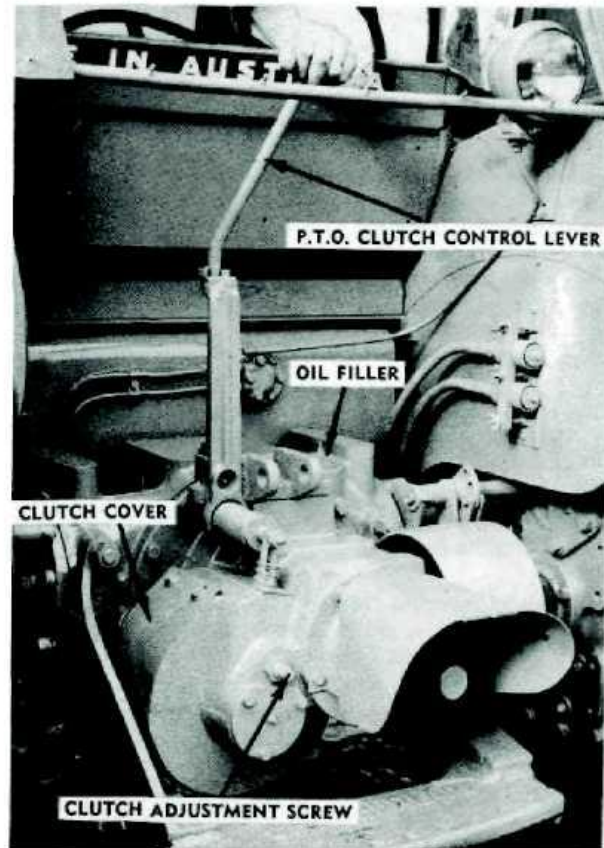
P.T.O. and Belt Pulley Unit.
